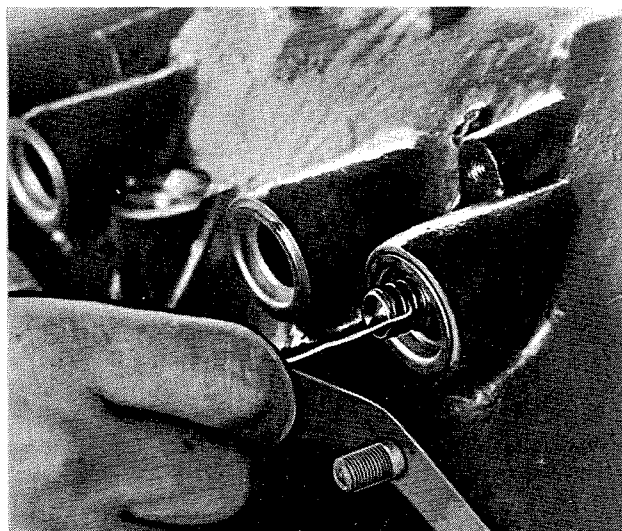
Removing Hydraulic Tappet Plunger Assembly
